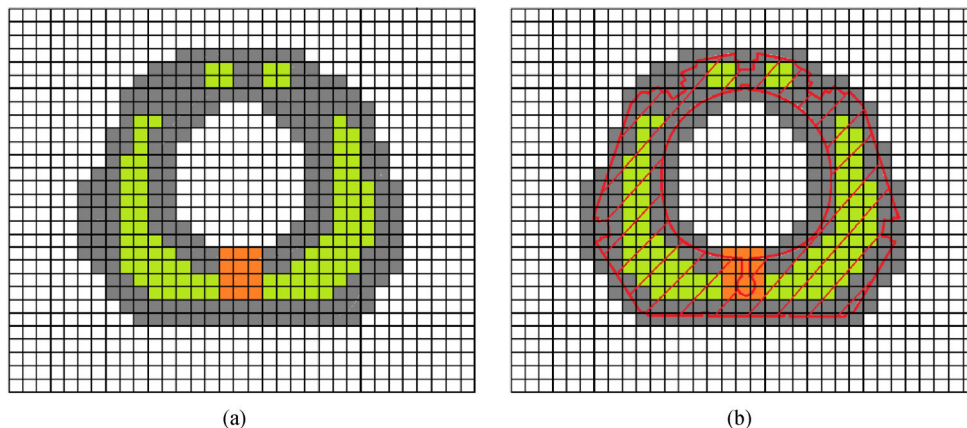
Multi-material sand mold 3D print forming method: (a) Multi-material sand layer and (b) mold.
